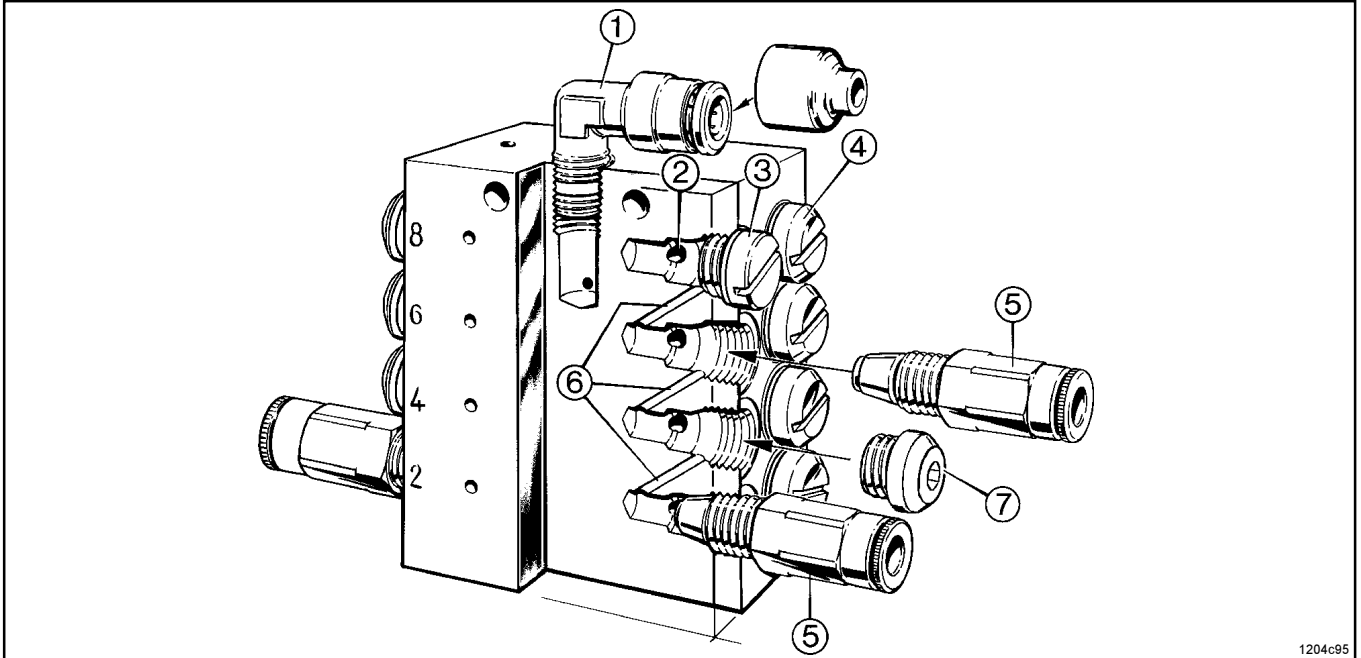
Install the push-in type outlets fittings and closure plugs in accordance with the dosage
